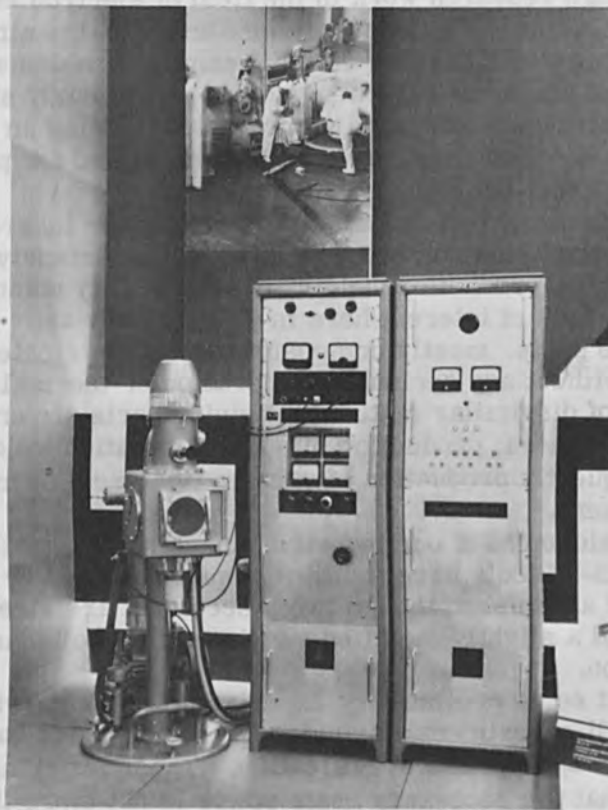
The laboratory version of the electron beam welding machine Type ESH-21.
